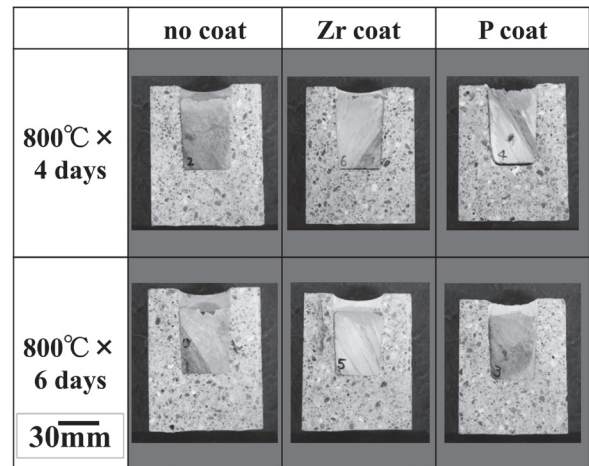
Cross-section surfaces of cups after holding molten metal.
